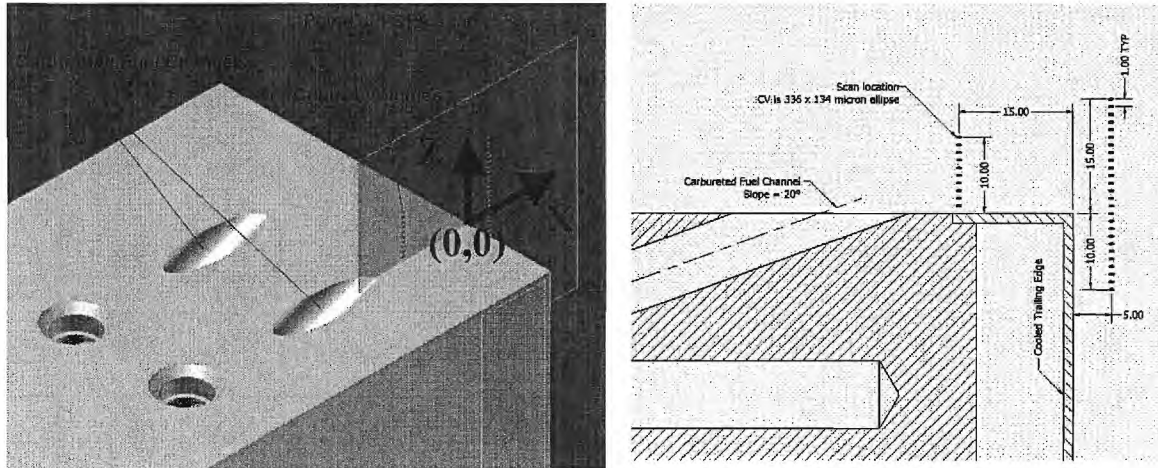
Schematic Detailing PDPA Scan Cross-Sections
